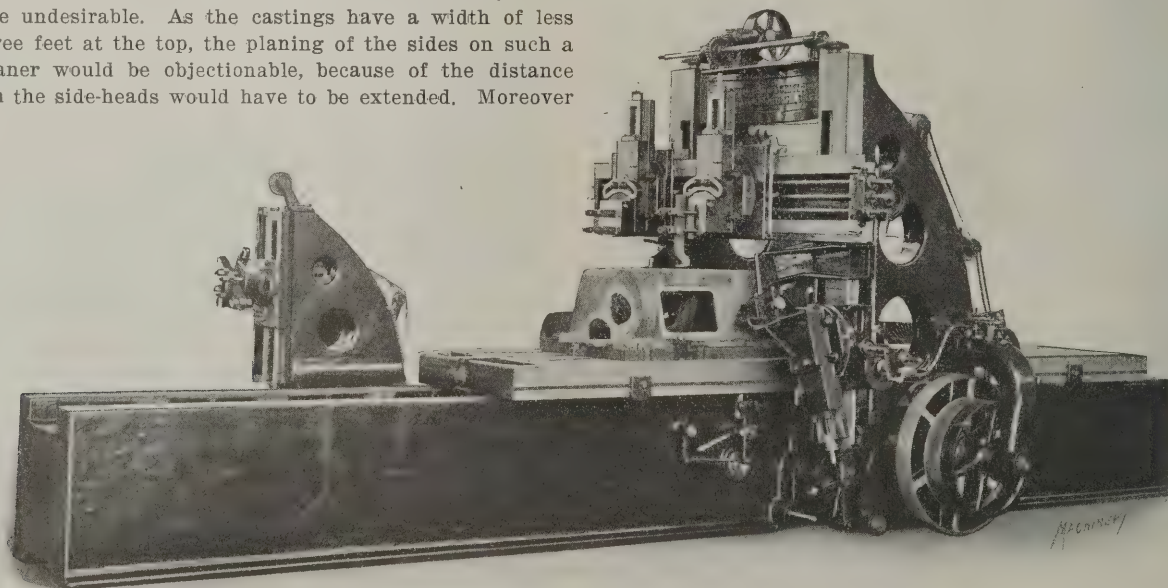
Special Planer built by Rockford Machine Tool Co., Rockford, Ill.
